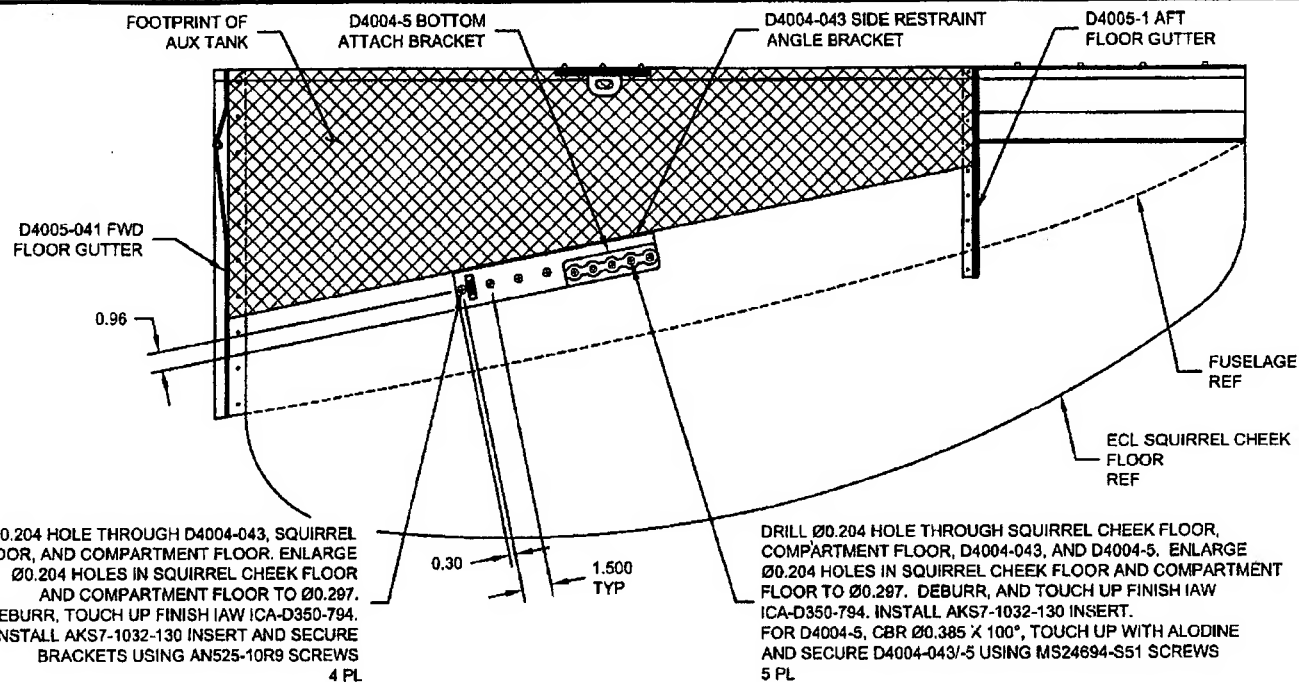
INSTALLATION ON SQUIRREL CHEEK FLOOR
